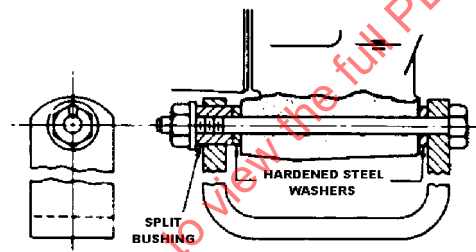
TYPICAL INSTALLATION OF SPLIT BUSHING IN BRACKET FOR SPOOL MOUNTING
